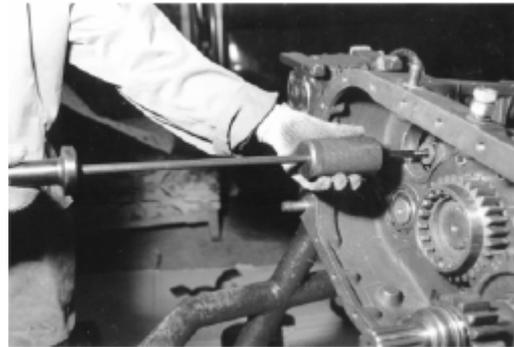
Remove The Reverse Shaft by Using Reverse Shaft Extractor
